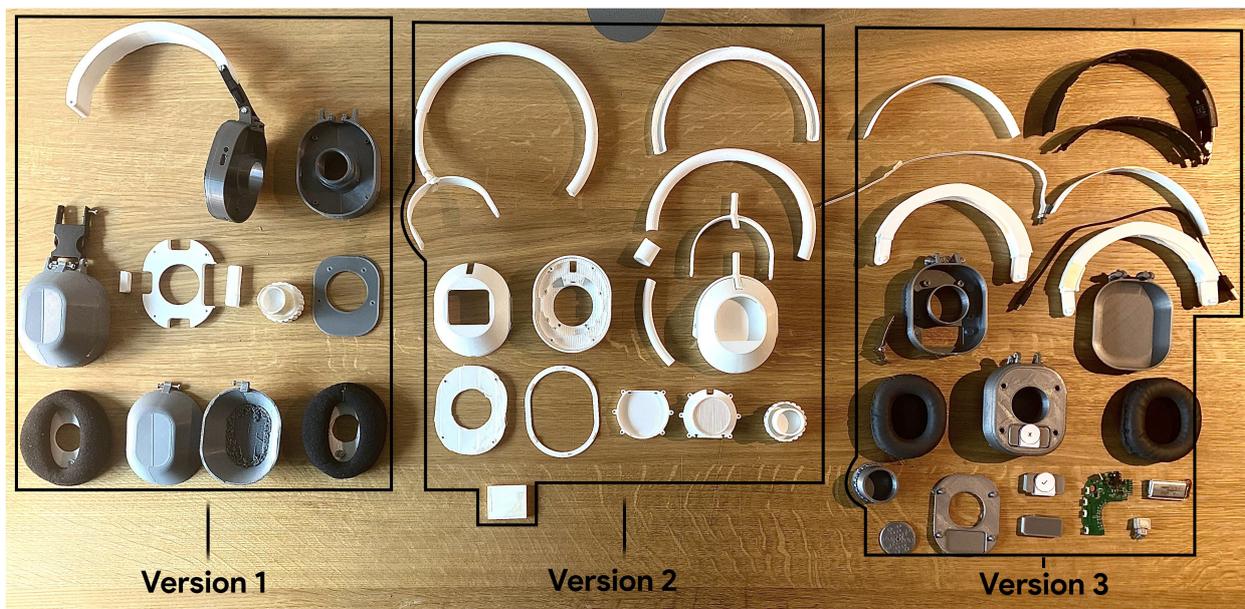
Early headphone prototypes (V1 - V3; Left to right), disassembled
